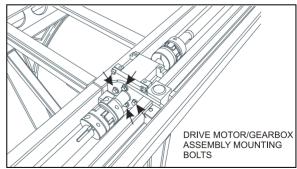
DRIVE MOTOR/GEARBOX ASSEMBLY MOUNTING BOLTS
